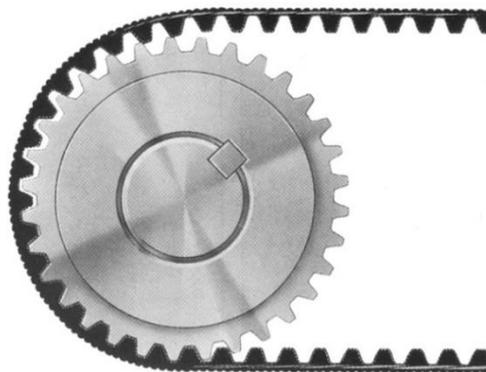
Synchronous belts rely on tooth engagement between the belt and pulley to transmit power. (Source: Gates Corporation)
